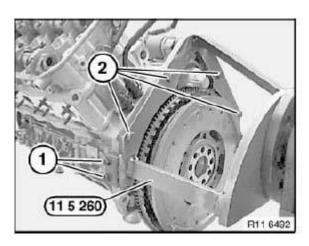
Securing Special Tool (11 5 260) To Crankcase With Bolts Courtesy of BMW OF NORTH AMERICA, INC.
